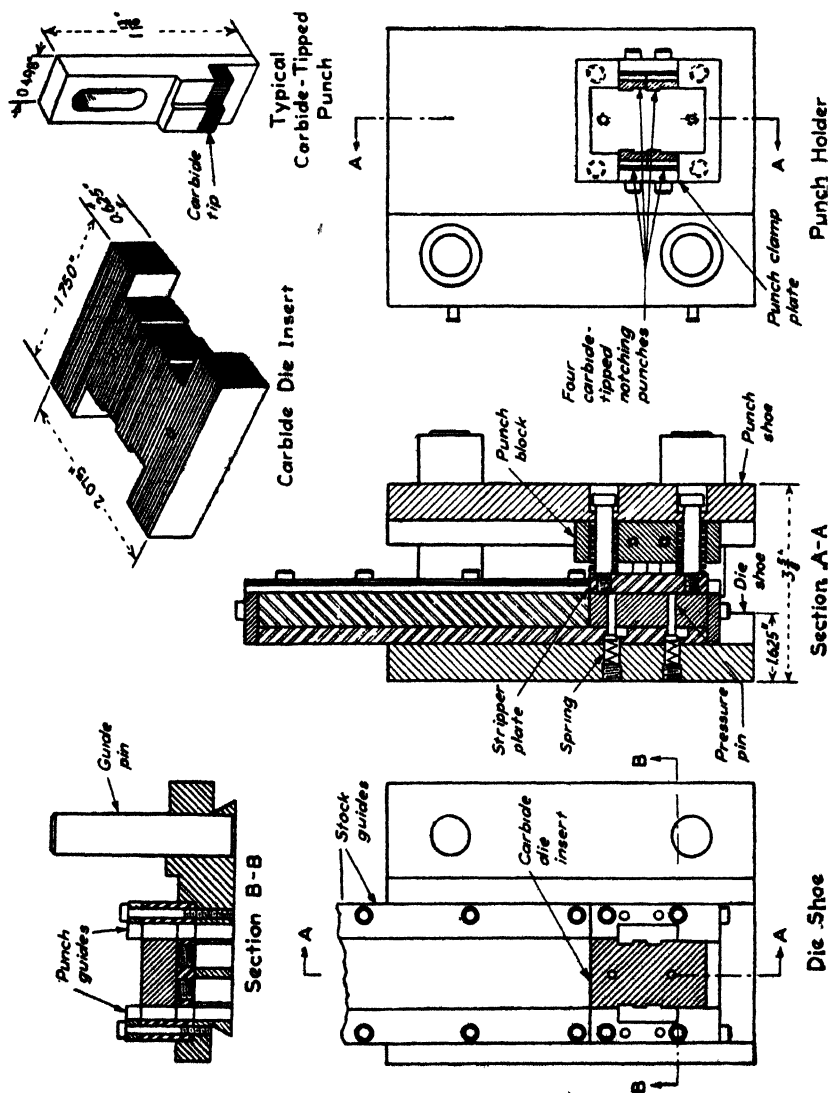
This Sylvania die for notching 0.005-in.-thick strip in a multi-slide machine, has a solid carbide die block clamped in place on the die shoe and four carbide-tipped notching punches adjustably mounted in the punch assembly.
